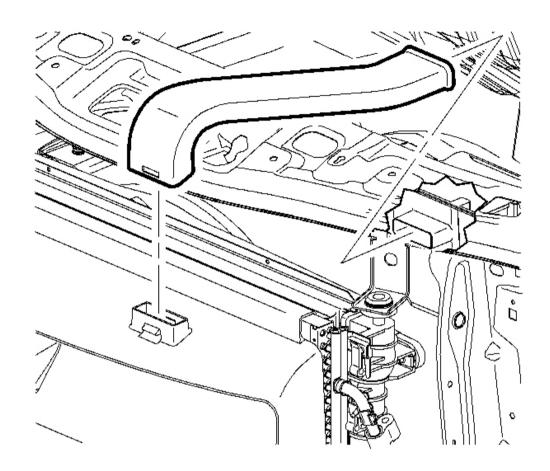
View Of Battery Box Inlet Air Duct Courtesy of GENERAL MOTORS CORP.
